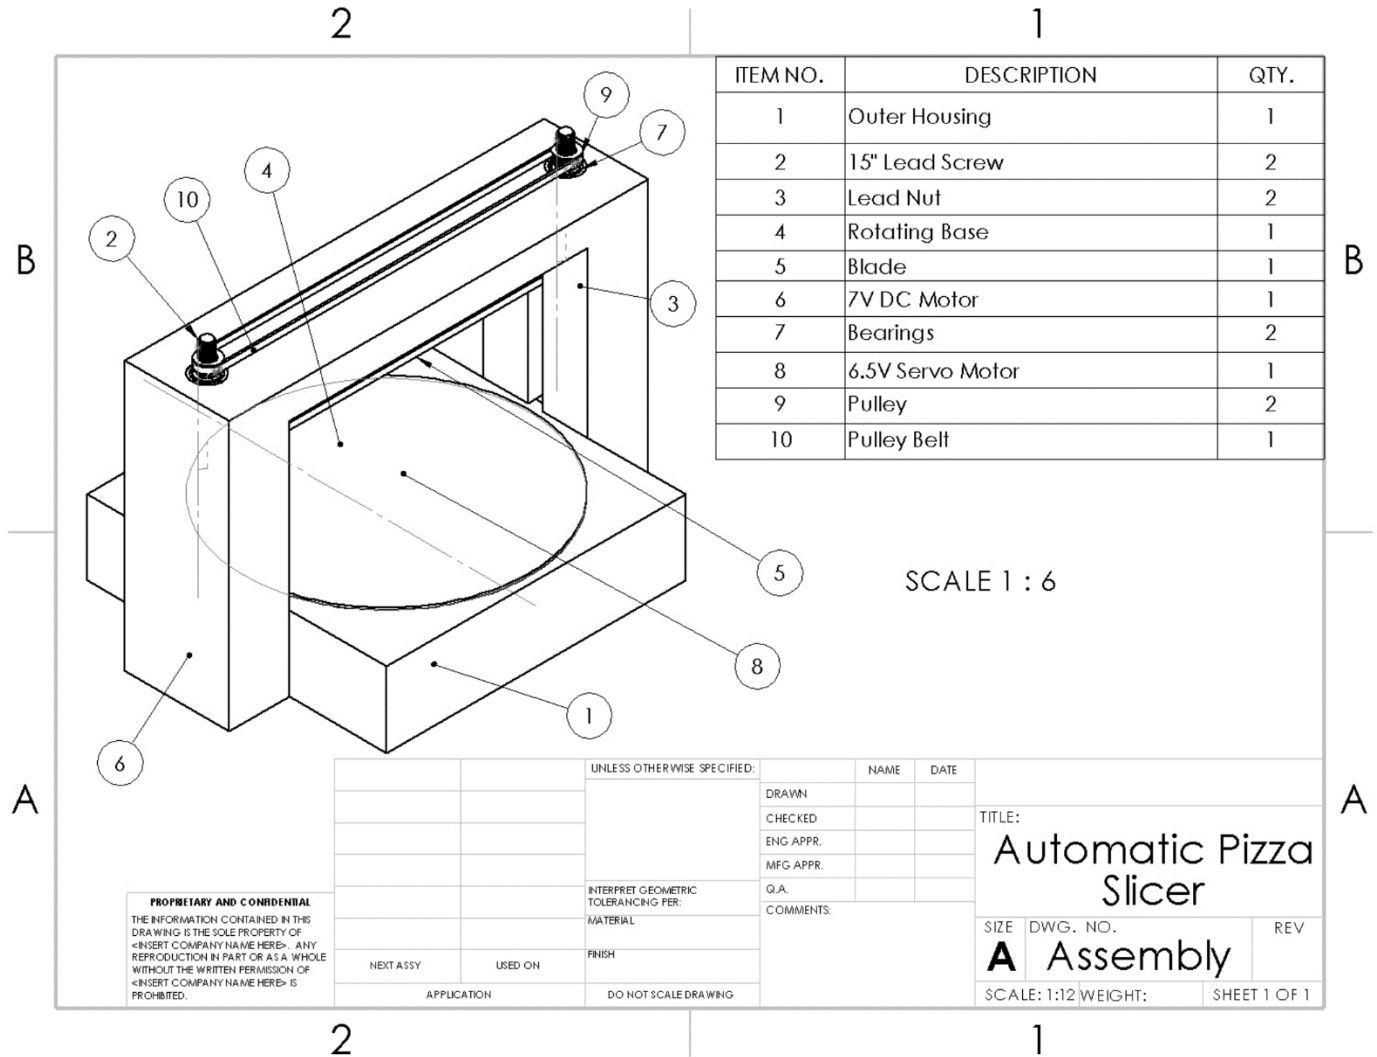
CAD embodiment of Automatic Pizza Cutter with BOM and balloons
